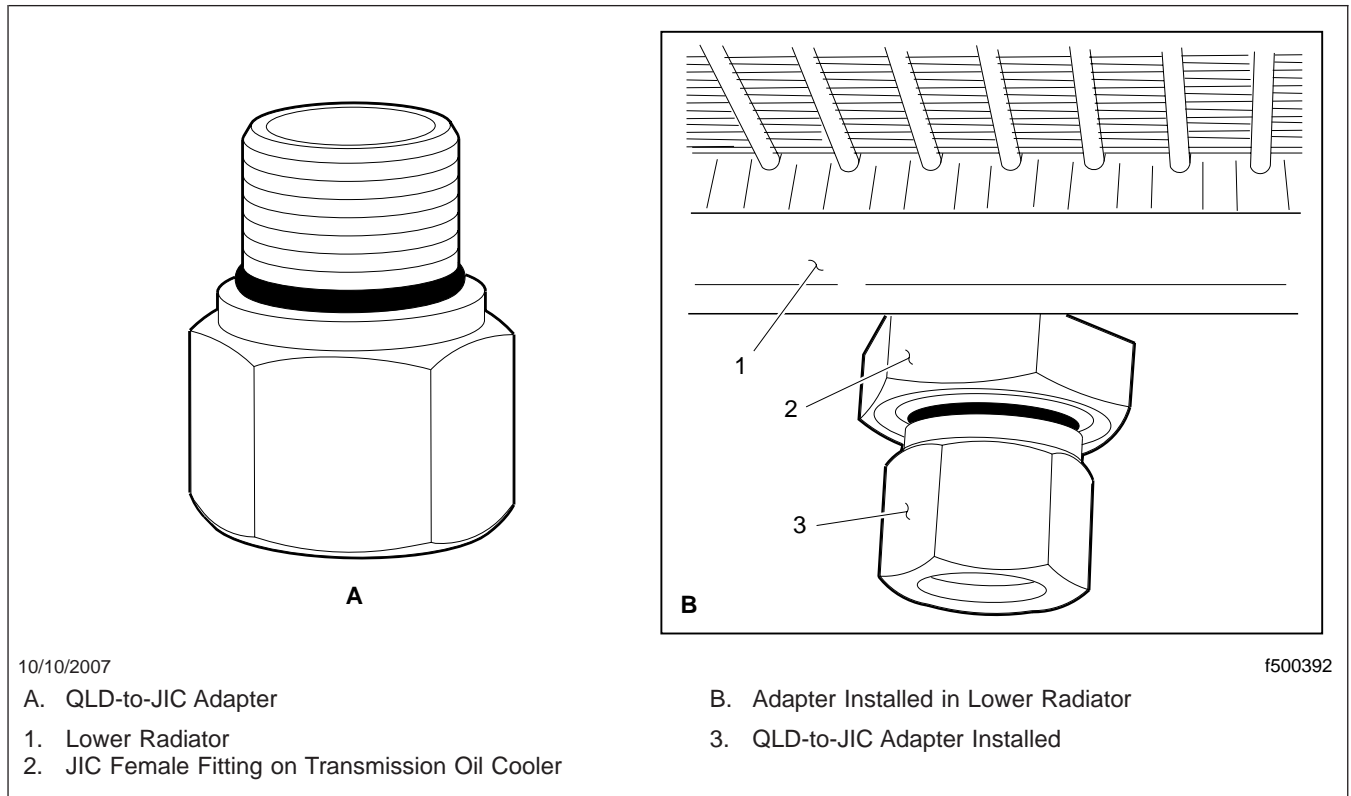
, QLD-to-JIC Adapter, p/n GT 7213 0003
